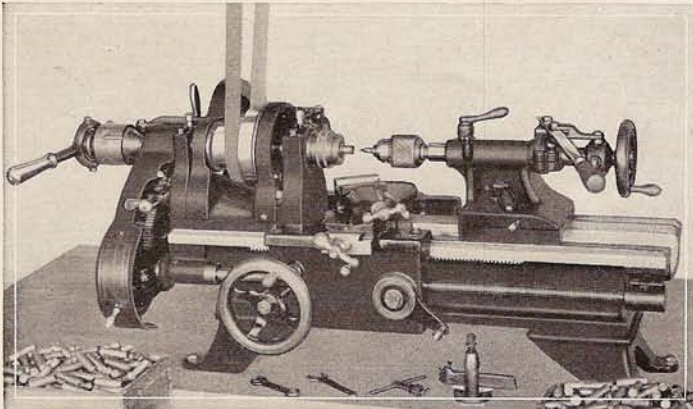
No. 22—9-inch Junior Lathe Equipped with Lever Draw-in Collet Chuck and Hand Lever Feed Tail Stock for Rapid Production
